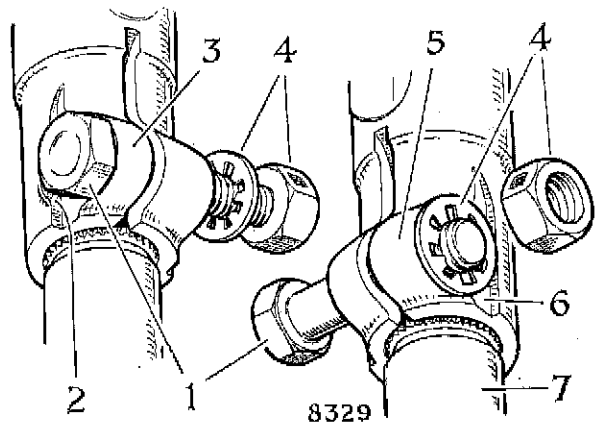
Showing the attachment of the inner column to the steering unit pinion
